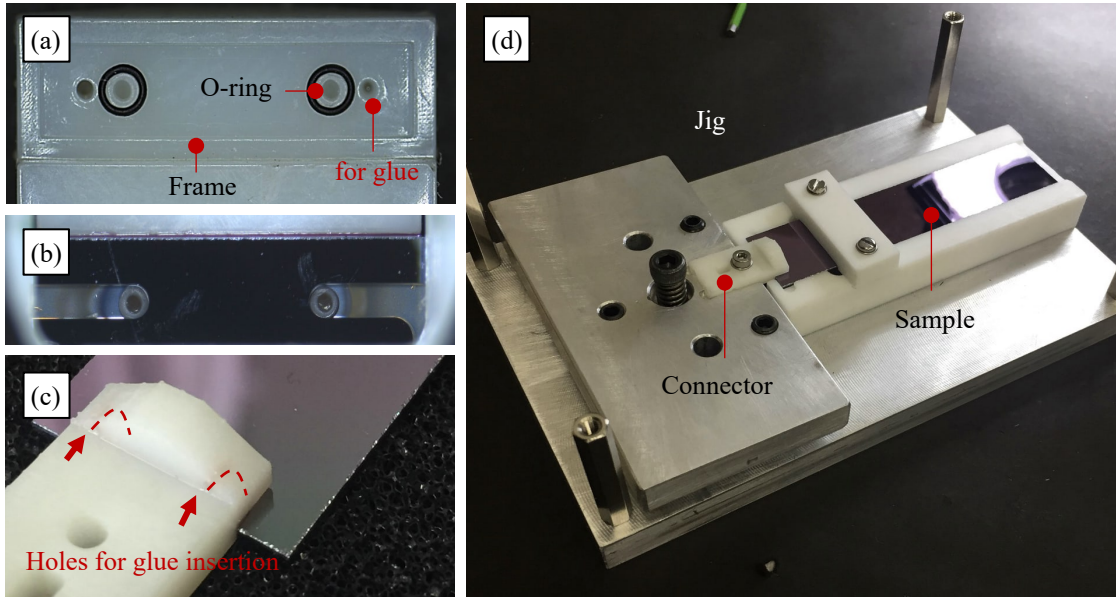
Assembly details of the 3D printed connector and the Si sample. (a) Detail of the connector (hole for the glue insertion, protrusions with their O-rings engaged and connector frame) at the interface with the silicon sample, (b) detail of the interface between the connector and the silicon sample taken from the glass cover side, (c) detail of the channels for the glue insertion and (d) alignment jig. The glue used at the interface was Araldite2020 [229] because of its low viscosity (150 mPas). The glue was injected into two dedicated channels (a and d), embedded in the connector. The two dedicated channels have a diameter of 0.4 mm. The assembly and the alignment were done by using a devoted jig (c) under an optical microscope (b). The outer diameter of the protrusion is 0.7 mm, while the diameter of the holes in the silicon is 0.8 mm. The O-ring (nitrile rubber material) has a diameter of 0.4 mm, an inner diameter of 0.7 mm and a cross-section diameter of 0.2 mm. The sample shown in Figure (d) does not have the inner part removed.
